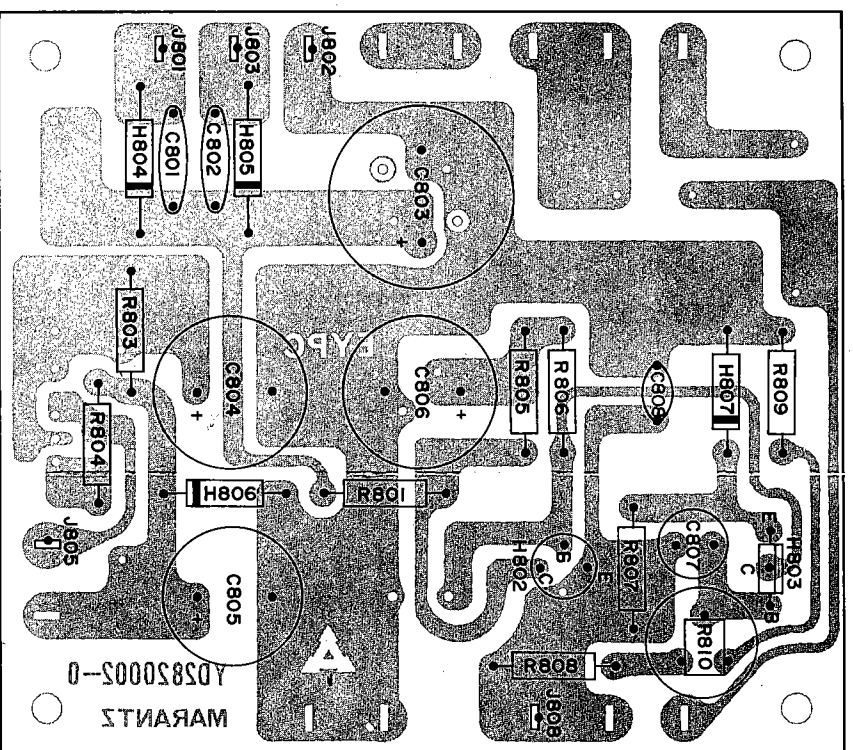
Regulated Power Supply Assembly P800 Component Locations
